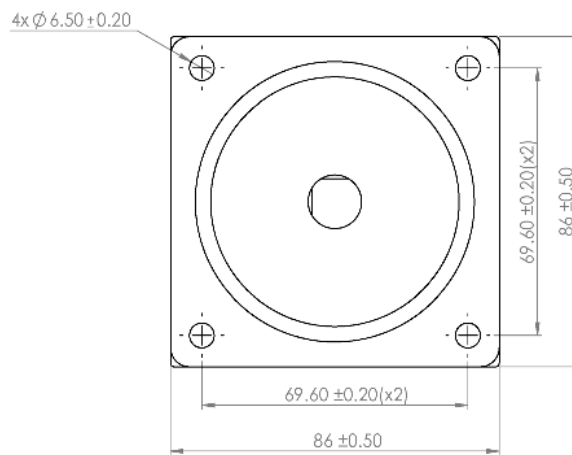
stepIM NEMA 34 (IP65) – Mounting (mm)
